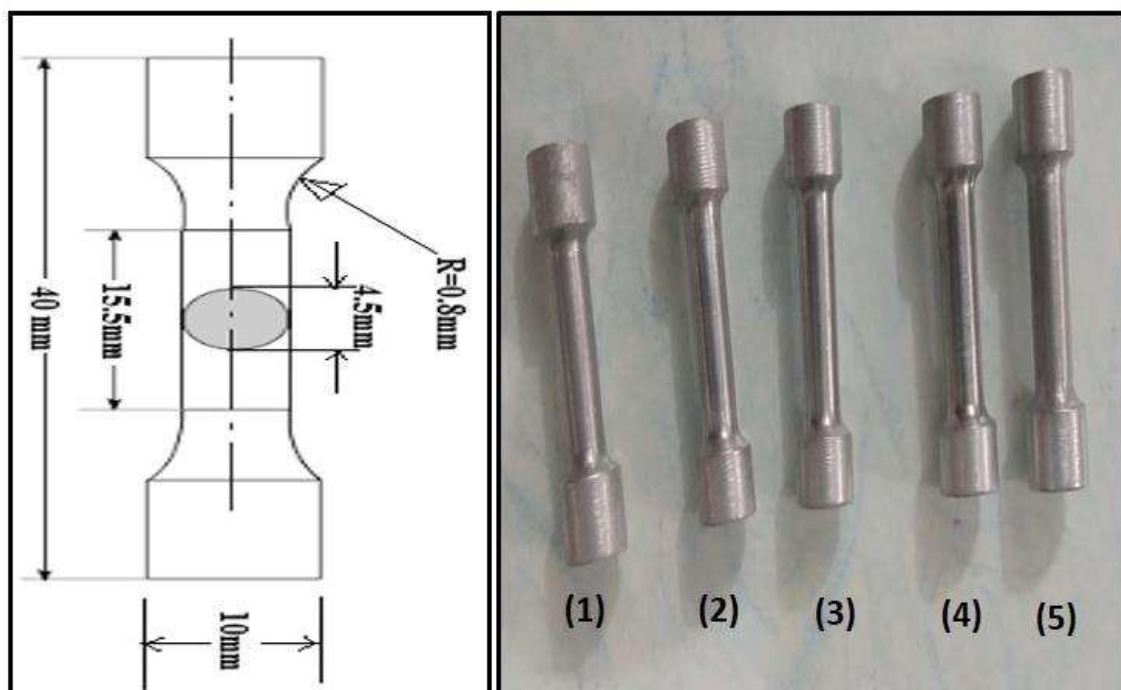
Schematic and pictorial measurement of a tensile test specimen
